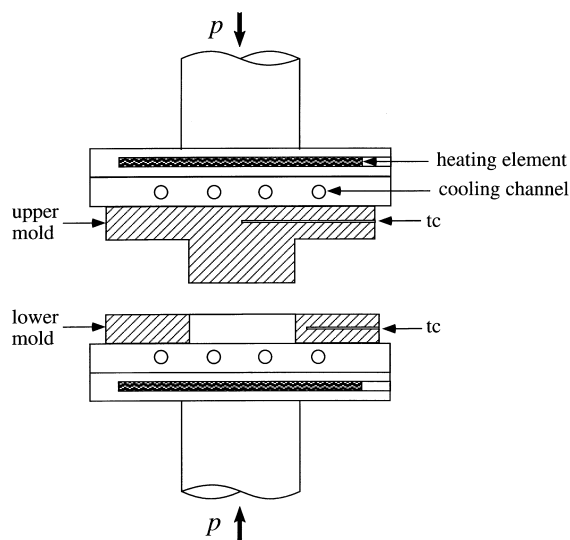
Schematic of the 50 × 50 mm matched-die mould showing the heating elements, cooling channels and thermocouples (tc)
